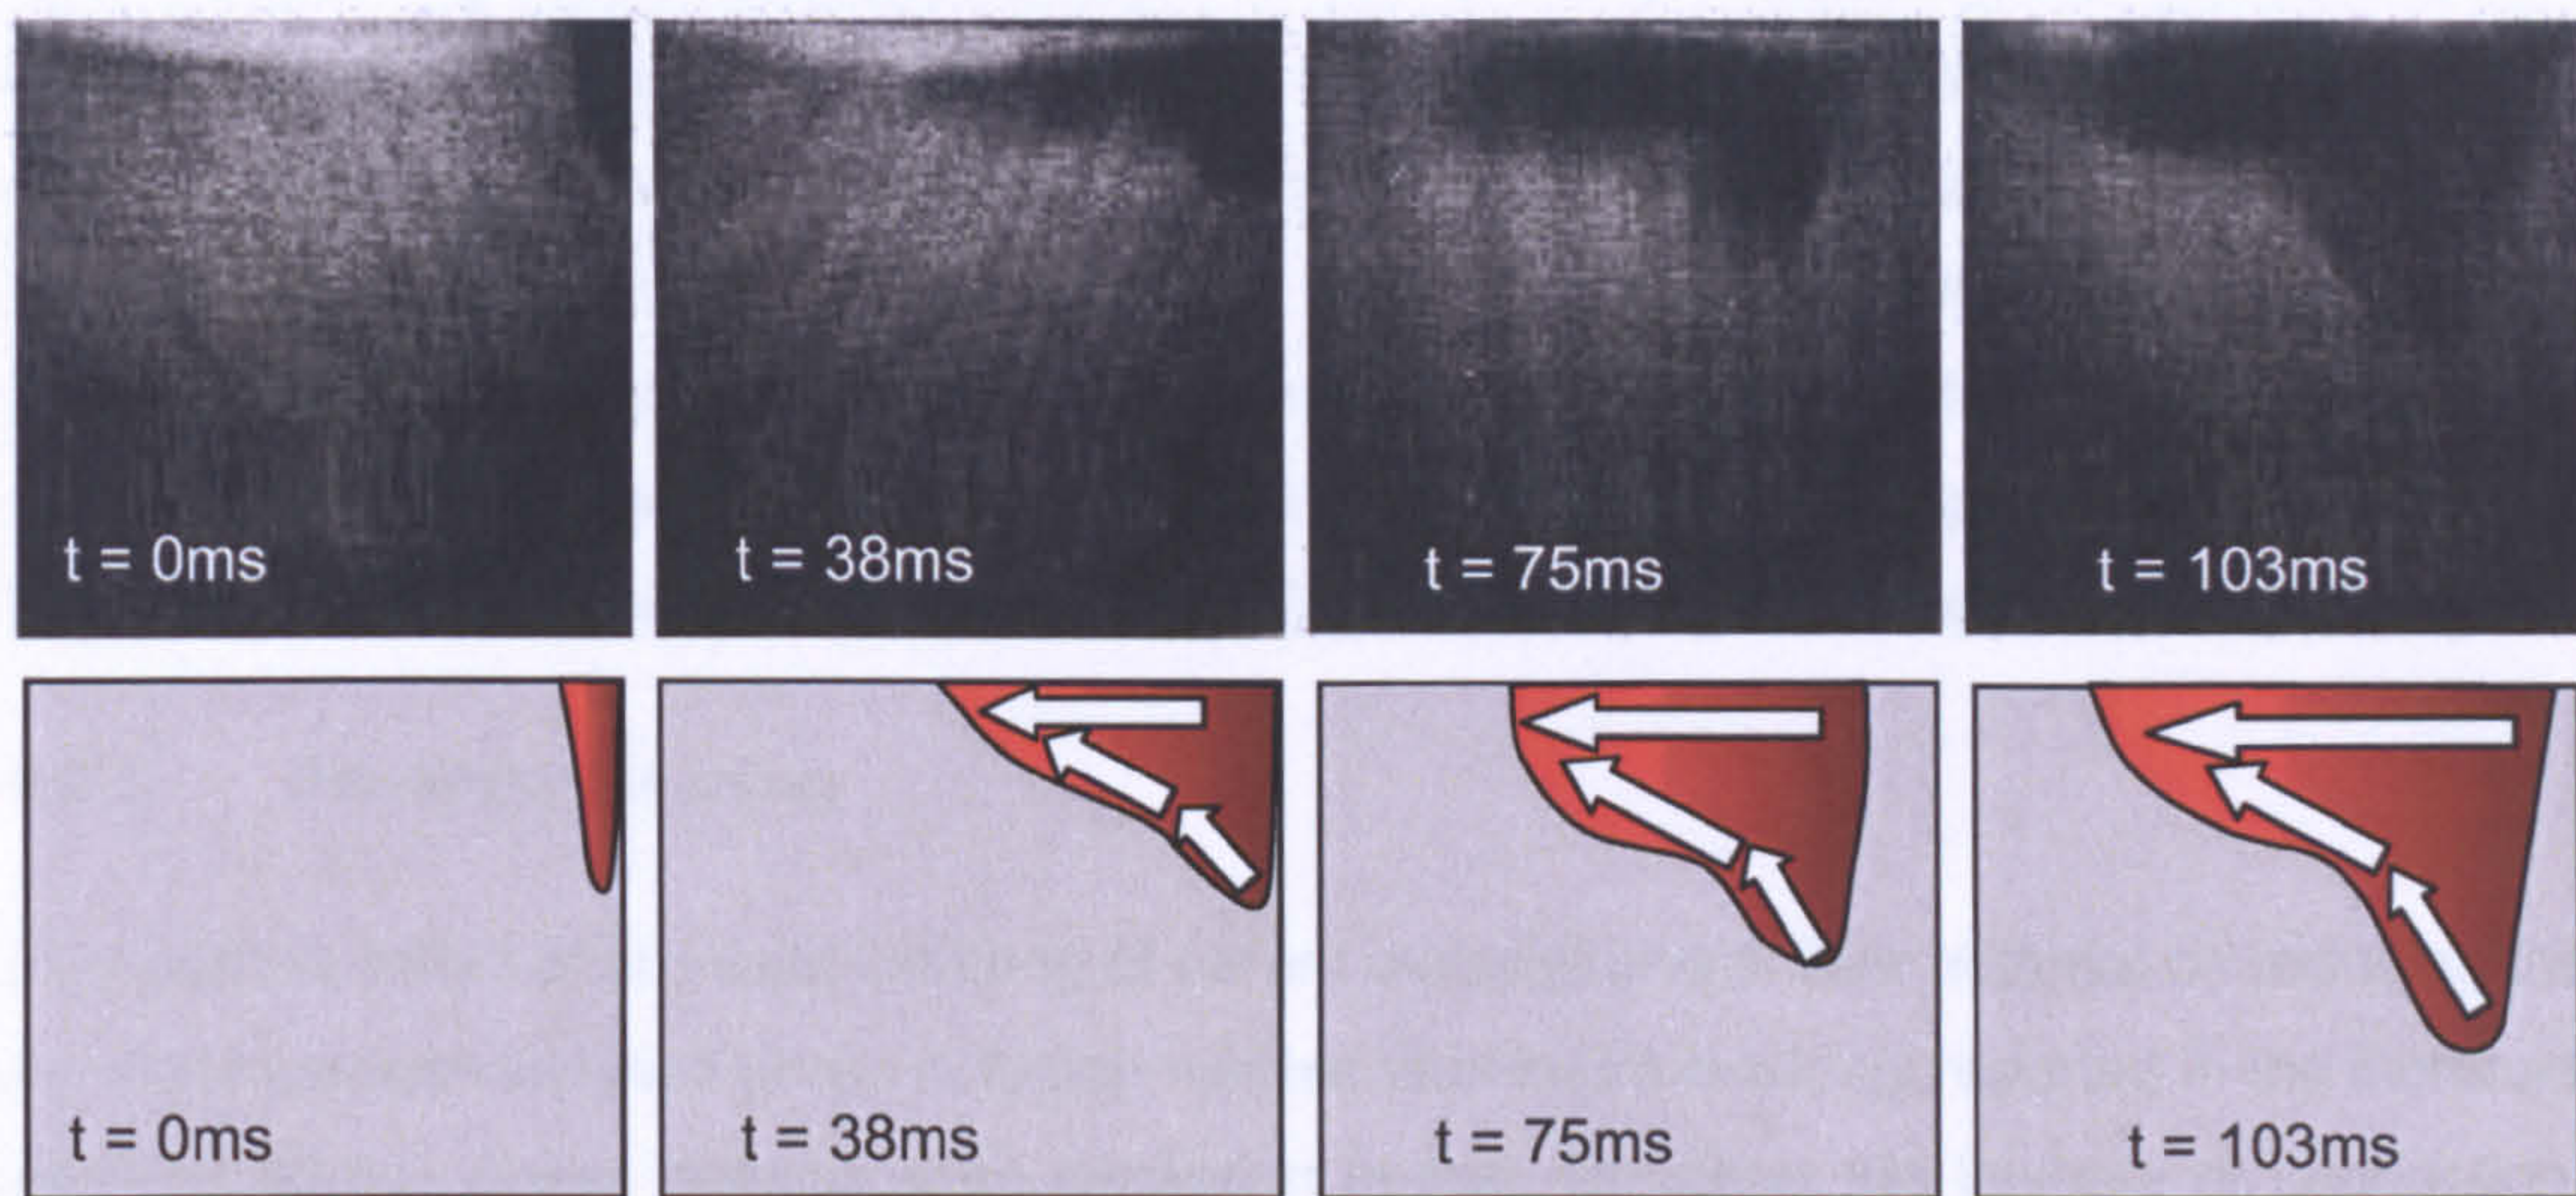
Formation of an aluminium laser weld pool visualised by welding over tin embedded in the sample using on-line digital radiography (37)
